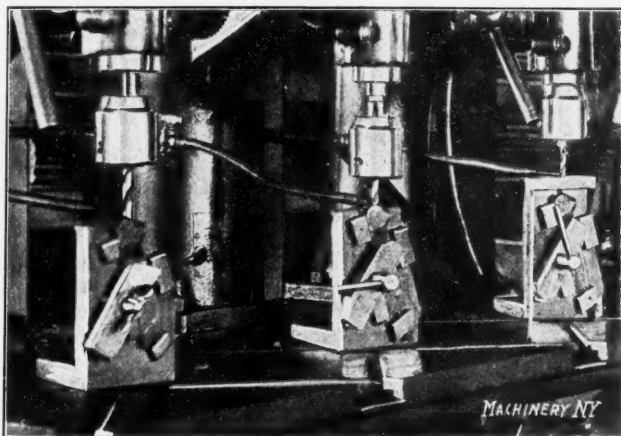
Drilling the Cutter Holes in the Straight Lathe Tool-holder
